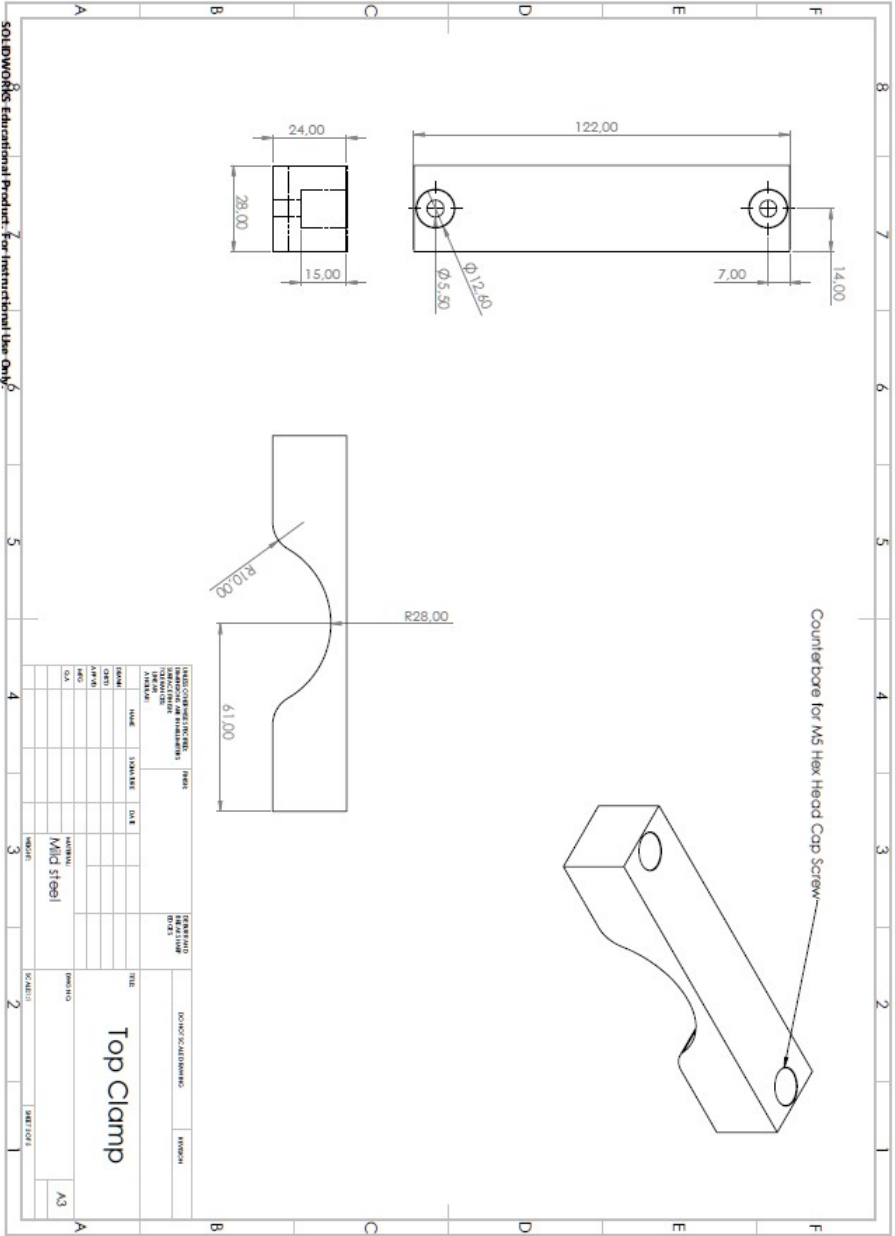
Part drawing for the sub-press sleeve top clamp.
